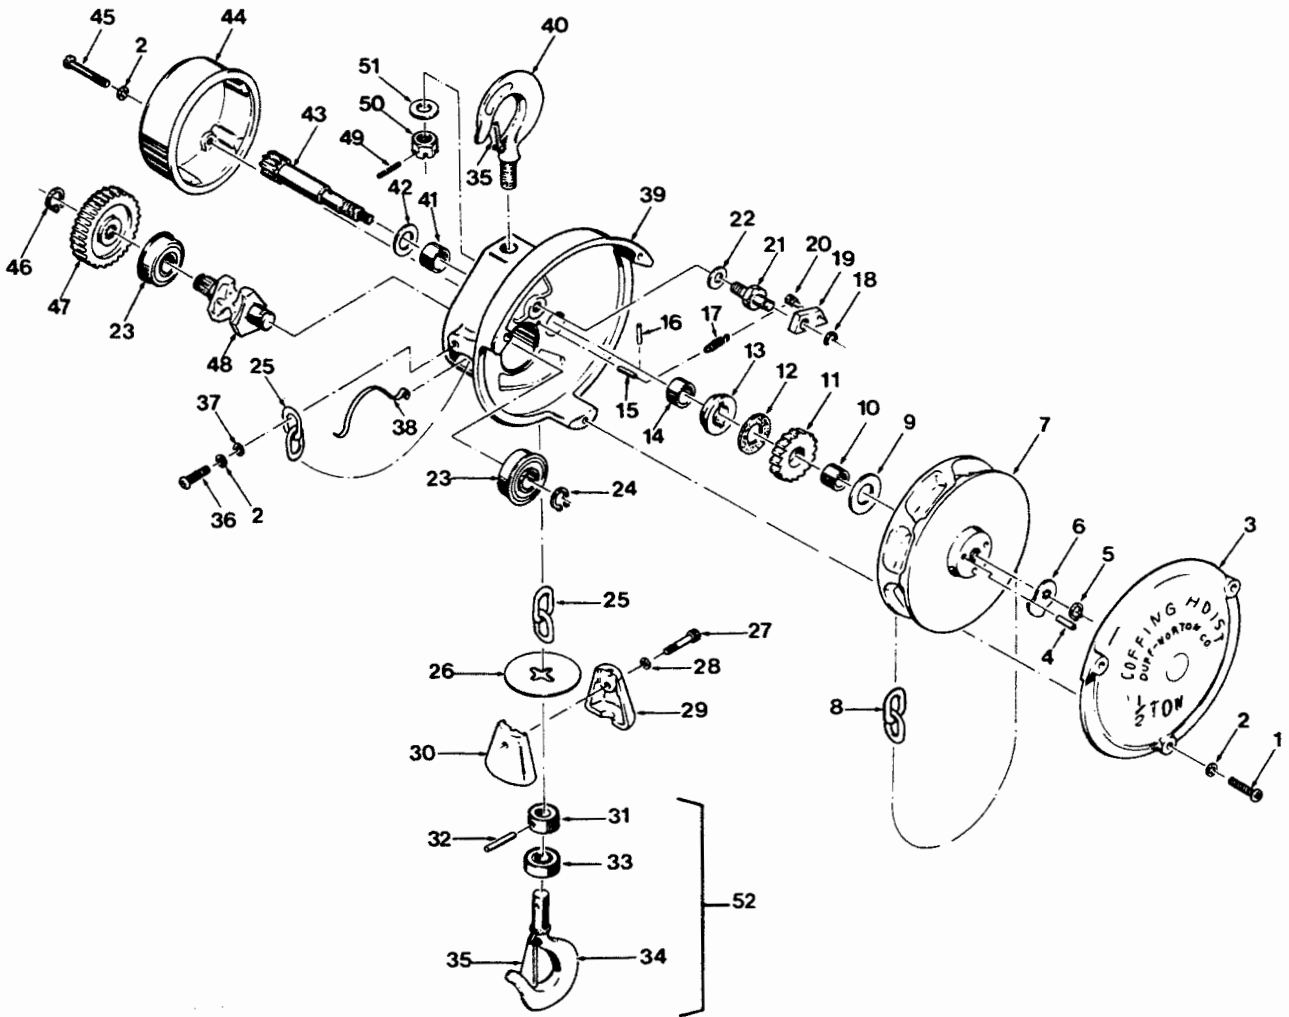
EXPLODED ILLUSTRATION OF MODEL CA HOIST
